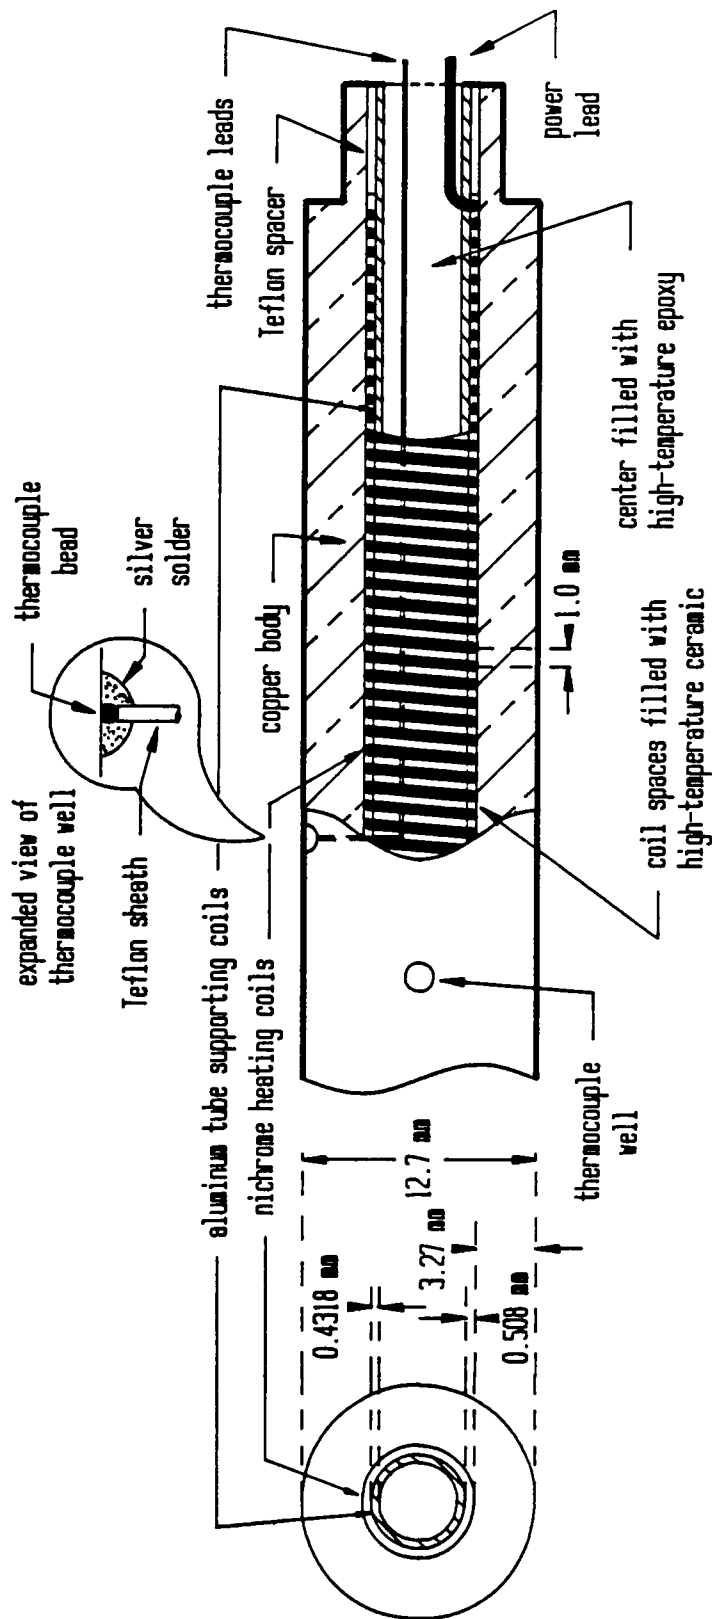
Schematic drawing of the heat-transfer probe: Details of the cylindrical heat-transfer probe used to measure the average (overall) surface-to-bed heat-transfer coefficient. The inset drawing shows details of a typical thermocouple well located on the surface of the probe
